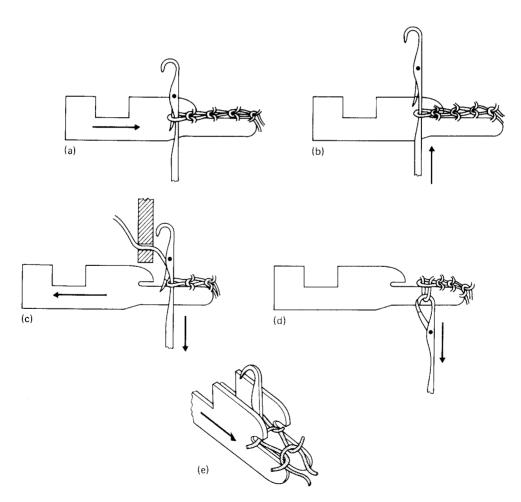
Knitting cycle of a single jersey latch needle machine.
